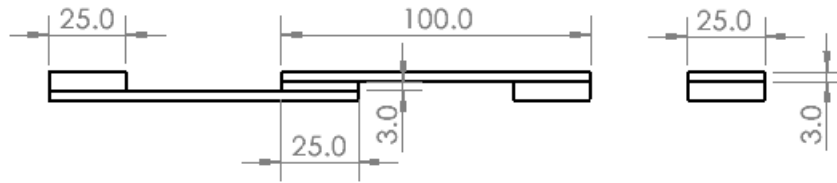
CAD drawing showing the dimensions of the lap shear specimens as manufactured (all dimensions in millimeters)
